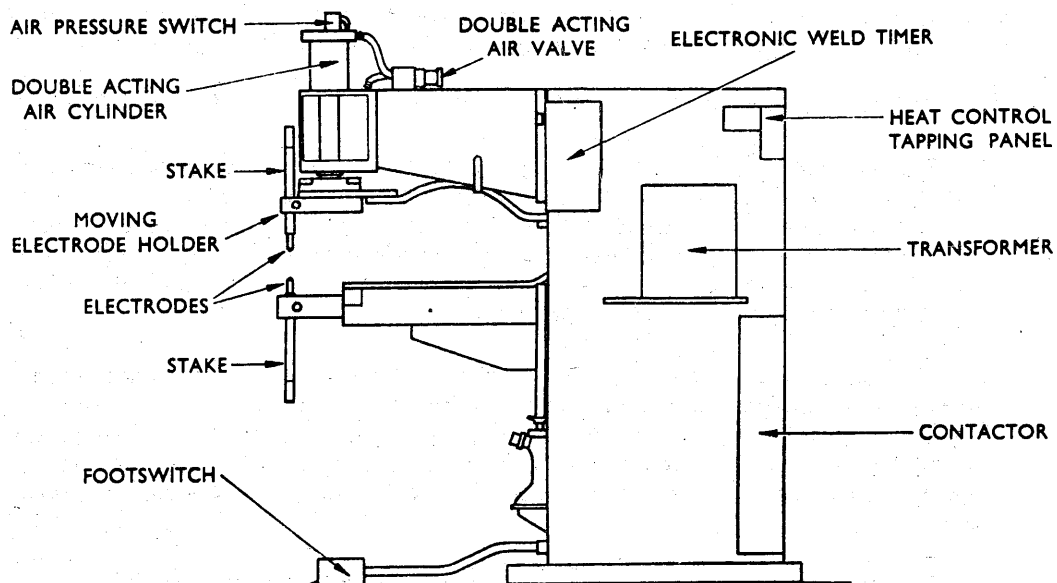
LAYOUT OF TYPICAL WELDING MACHINE
